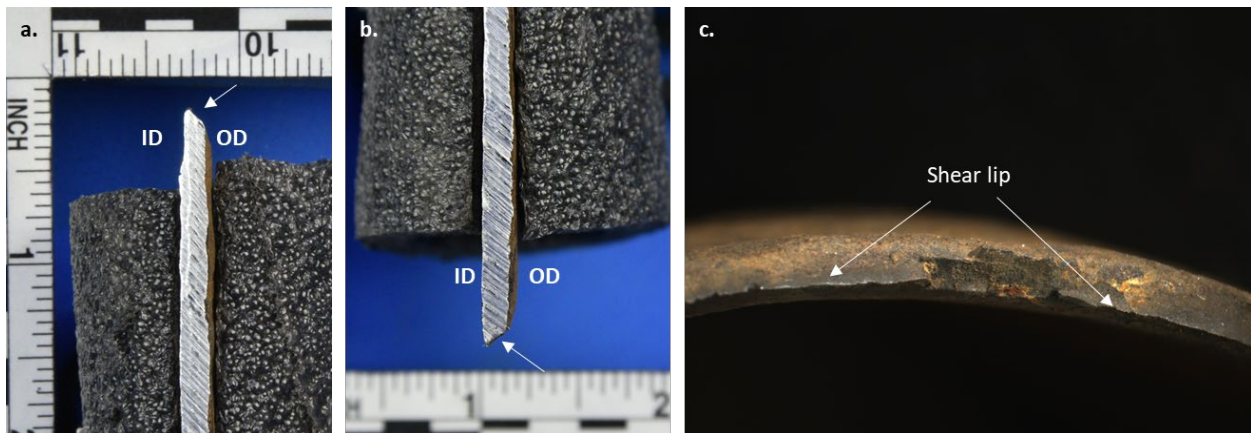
Circumferential Fracture Surface (a, b) 45° Shear and (c) Shear Lip
